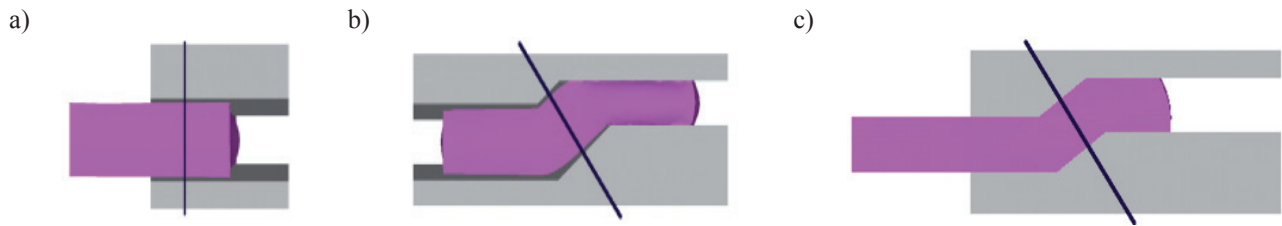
Layout of the cross sections for the location of strain-stress state, a) wedge dies; b) step-wedge dies; c) flat step dies
